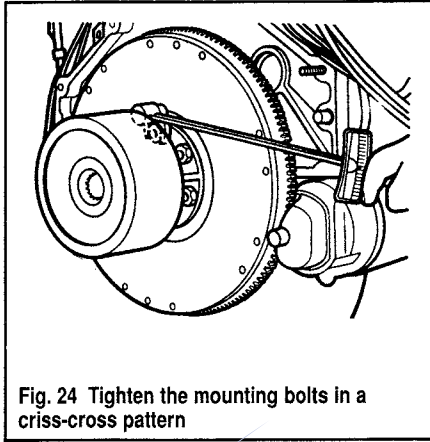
Tighten the mounting bolts in a criss-cross pattern
